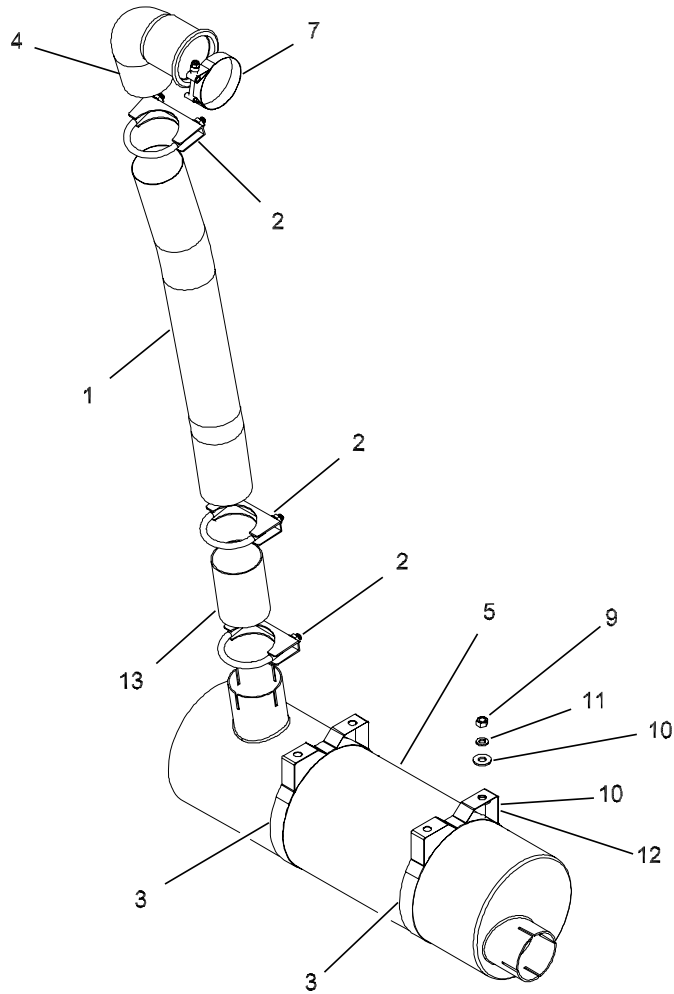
EXHAUST ASSEMBLY, CUMMINS
